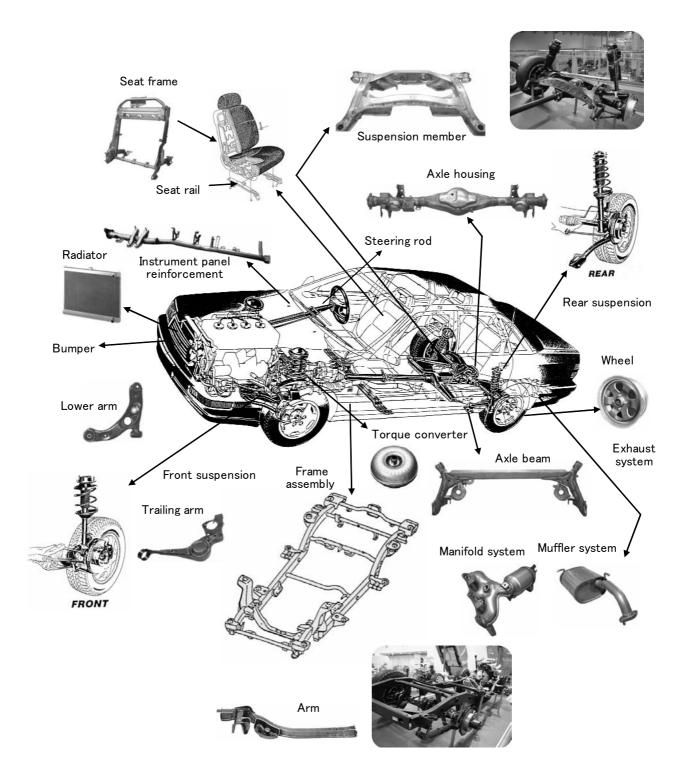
Varieties of auto parts where gas metal arc welding is applied. (MG-51T is used for welding parts of mild steel and 490 MPa high tensile strength steel)
